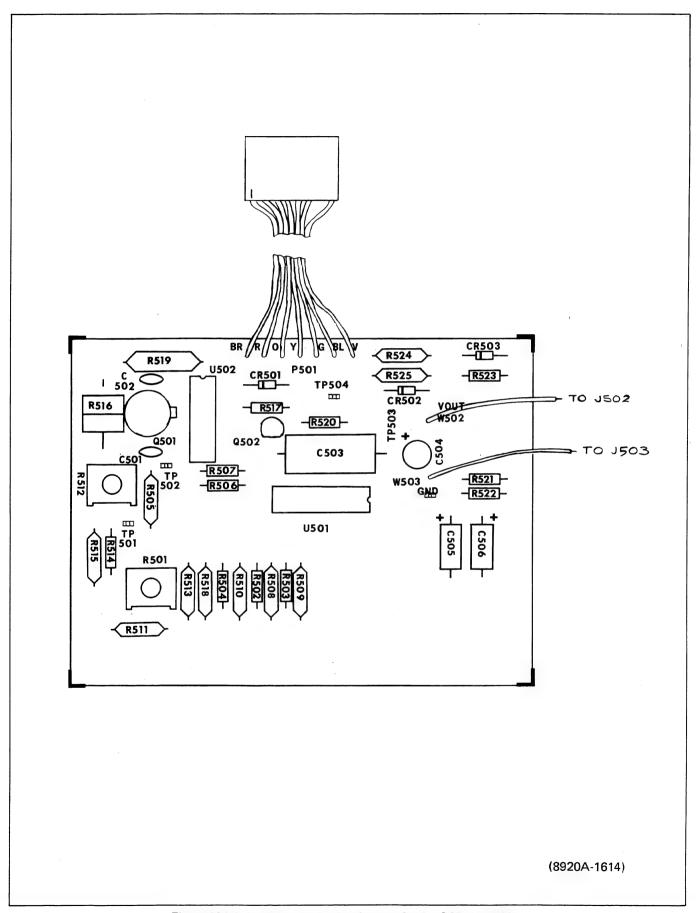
Logarithmic Analog Output Option PCB Assembly
